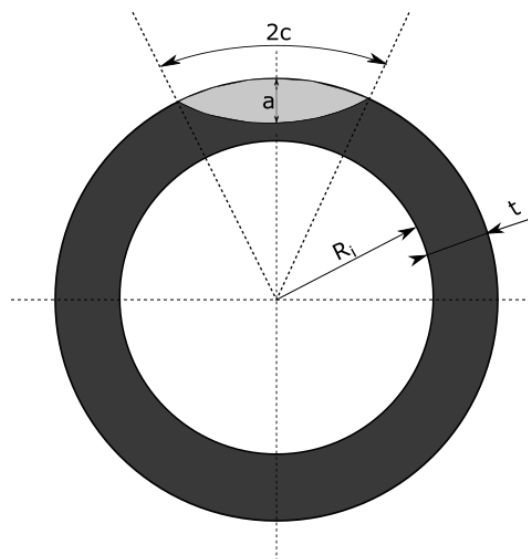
RS - Pipe/cylinder containing surface axial defect - Membrane & Bending stress
